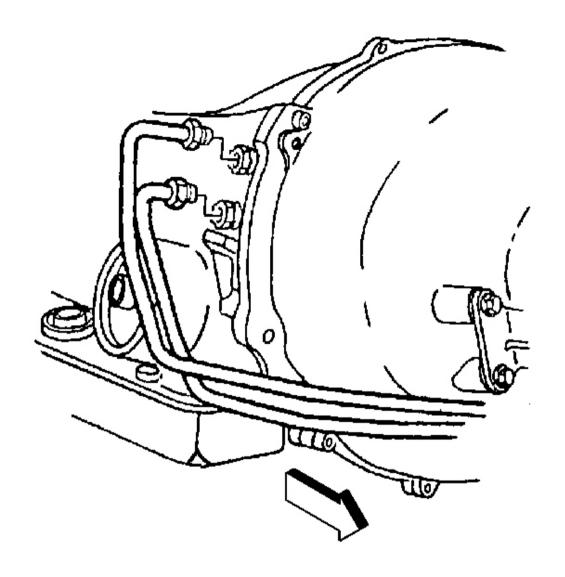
TOC Rear Upper & Lower Pipe Fittings Courtesy of GENERAL MOTORS CORP.
